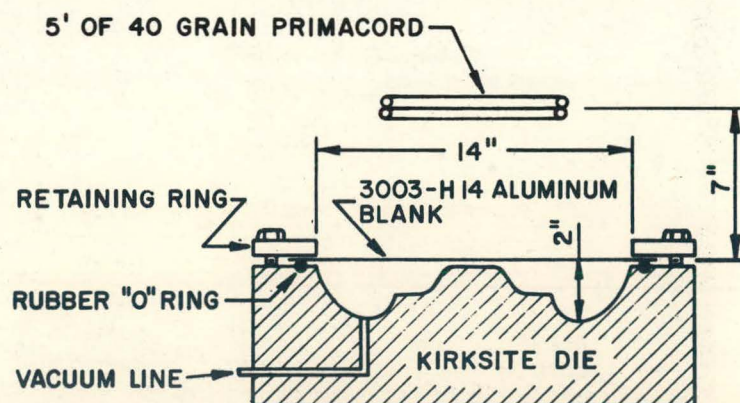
Arrangement for explosive forming of part at Bristol-Aero-Industries Ltd.
